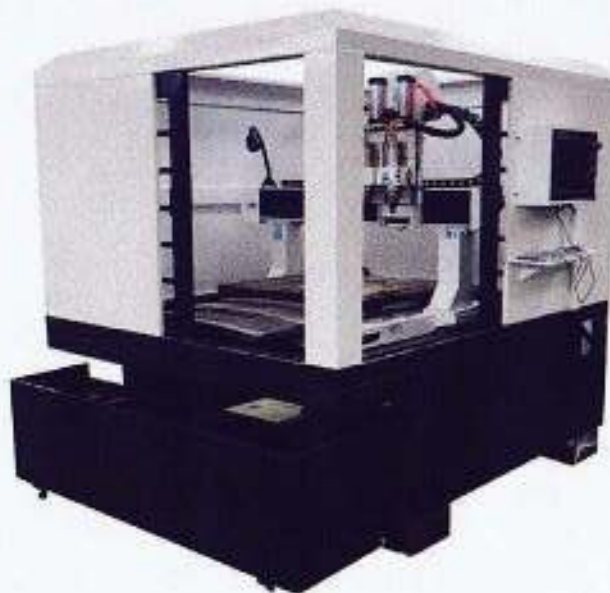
A Typical CNC Machine (Image courtesy: stylecnc.com)
